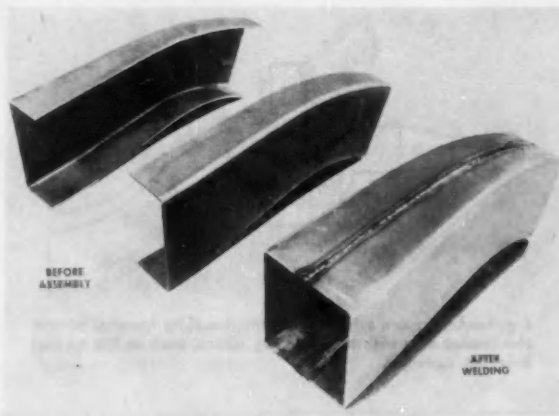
THE CENTER SECTION is formed from two pressed-metal stampings, one right hand and the other left. They are joined by submerged arc welding.
